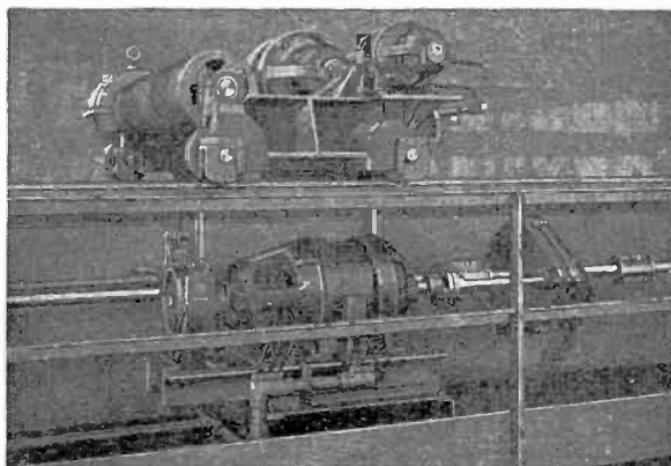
,881.—*Euclid crane construction 8. Side view of trolley, showing type of bridge drive gear case sometimes used.* The drive is oil tight. The shoe type bridge brake is operated by means of a foot pedal in the operator's cab. This brake is mounted on an extension of the motor shaft.
